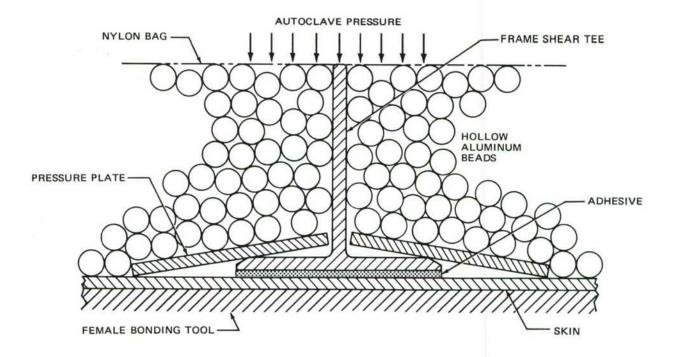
PROBLEMS USING HOLLOW ALUMINUM BEADS WITH THE FEMALE BOND TOOL
